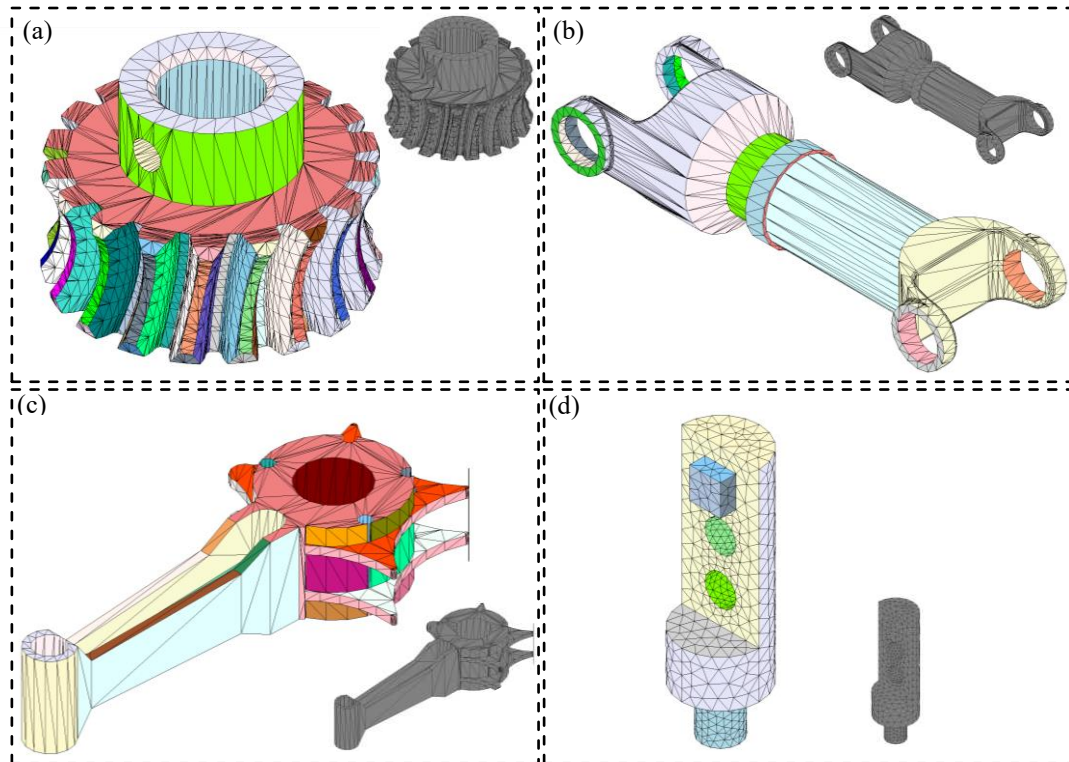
Example of STL model region segmentation: (a) worm gear, (b) automobile transmission front shaft, (c) engine connecting rod, (d) test workpiece to be cleaned by laser.
